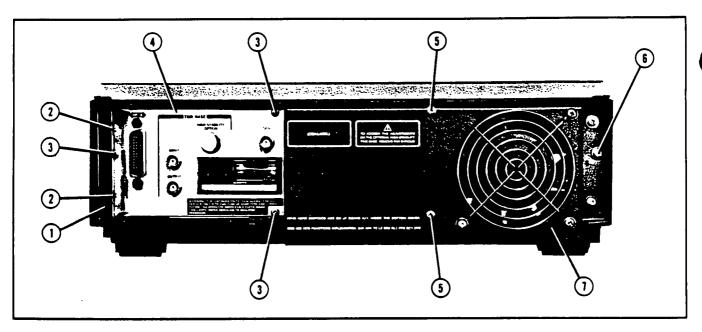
(2425A to 2509A). Rear-Panel and Fan Shroud Removal
